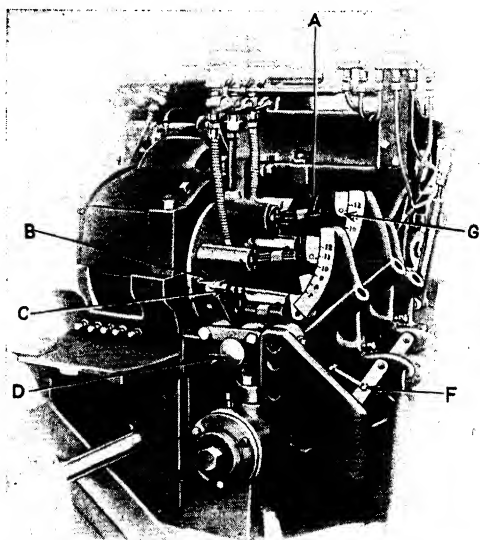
Davenport tool spindle head. *A*, Turnbuckle adjustment of tools. *B*, Stock-stop latch. *C*, Stock stop. *D*, Knob disconnects the cams from the worm wheel. *F*, Latch holds the levers away from the cams. *G*, Tool feed adjustment.
